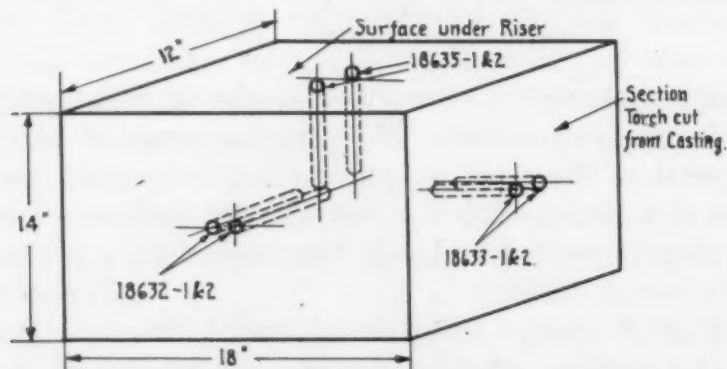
Core Drill Tests from Full Size Prolongation Number 2 of Flywheel Casting.
